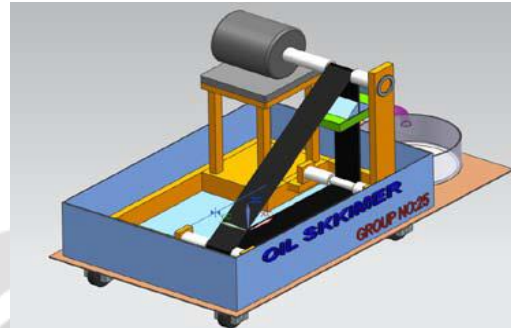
3D CAD model of oil skimmer conceptual model [3]
